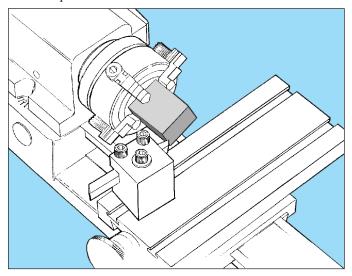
Holding a square work piece in a 4-jaw chuck.
